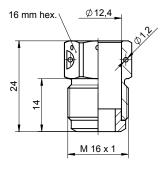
Mounting nut M16x1, Type 6419A21D for Sensor with 7/16" connector
